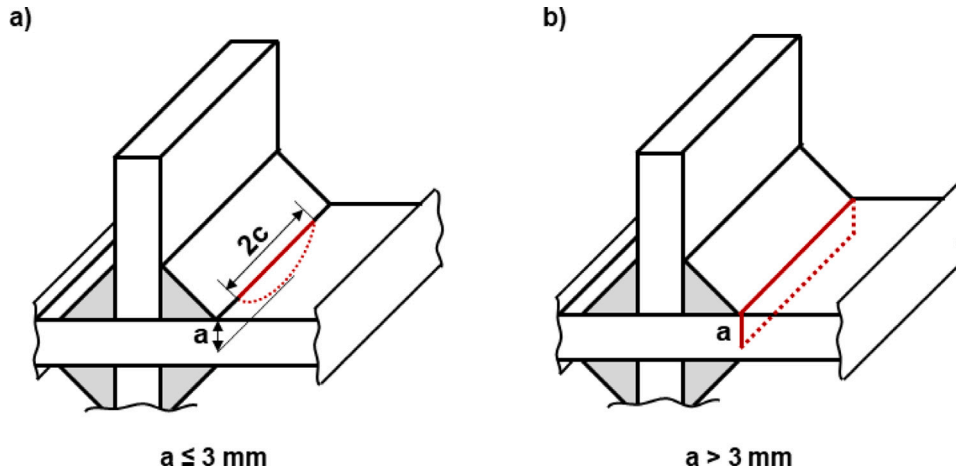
Sketch of a transverse stiffener (a) with a quarter elliptical crack at the weld toe (b) with a continuous crack front at the weld toe.
